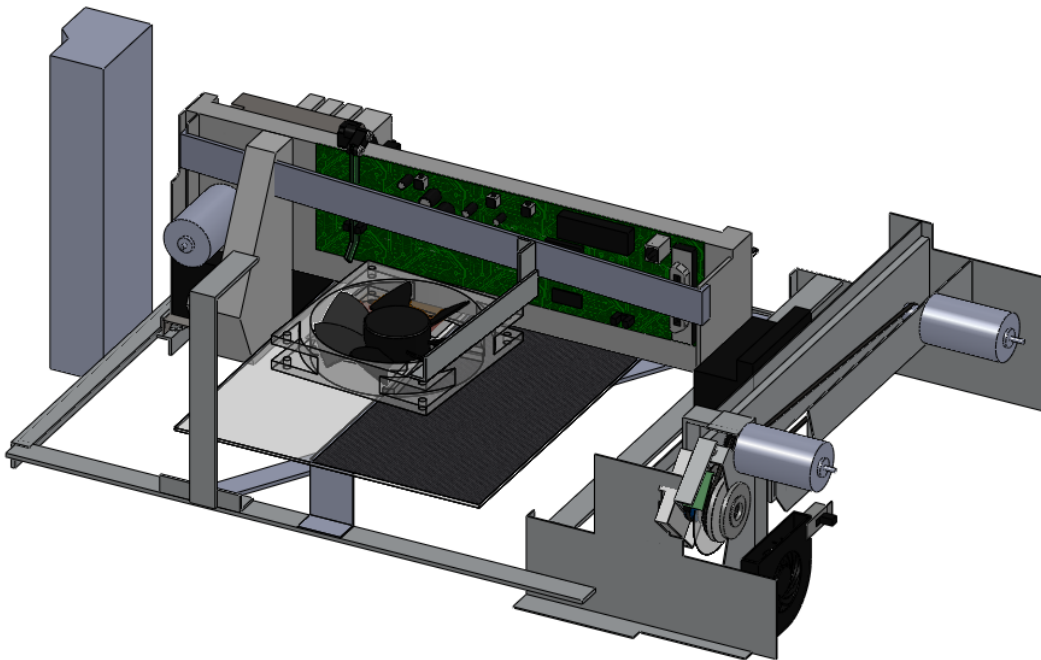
Reverse View of Completed Printer Displaying Drying Fan
